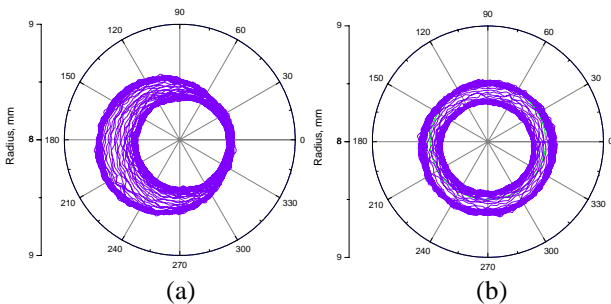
2-D laser profile; typical of (a) explosively and (b) hydraulically expanded mock-up tube.
